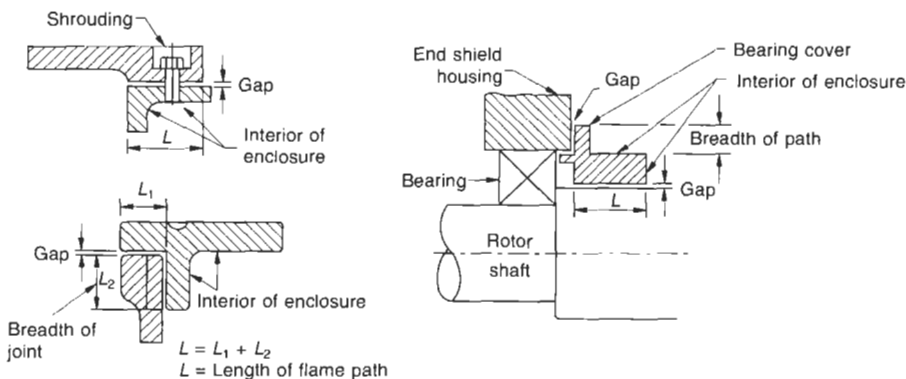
Flame paths and gaps in a flame-proof or explosion-proof motor
